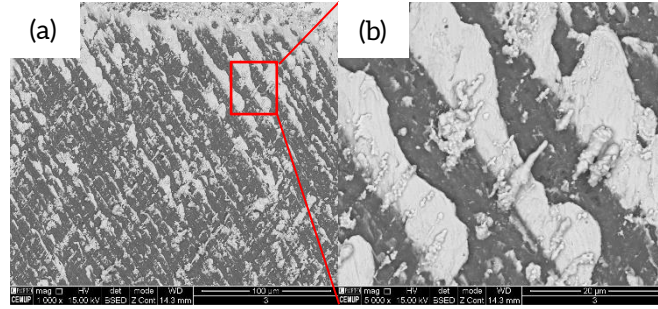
Adhesion of material to grinding marks on the DM4Z end mill: (a) flank face of the tool with magnification x1000 and (b) material of Inconel 718 that melted and adhered to the flank face along the grinding lines of the tool (magnification x5000).
